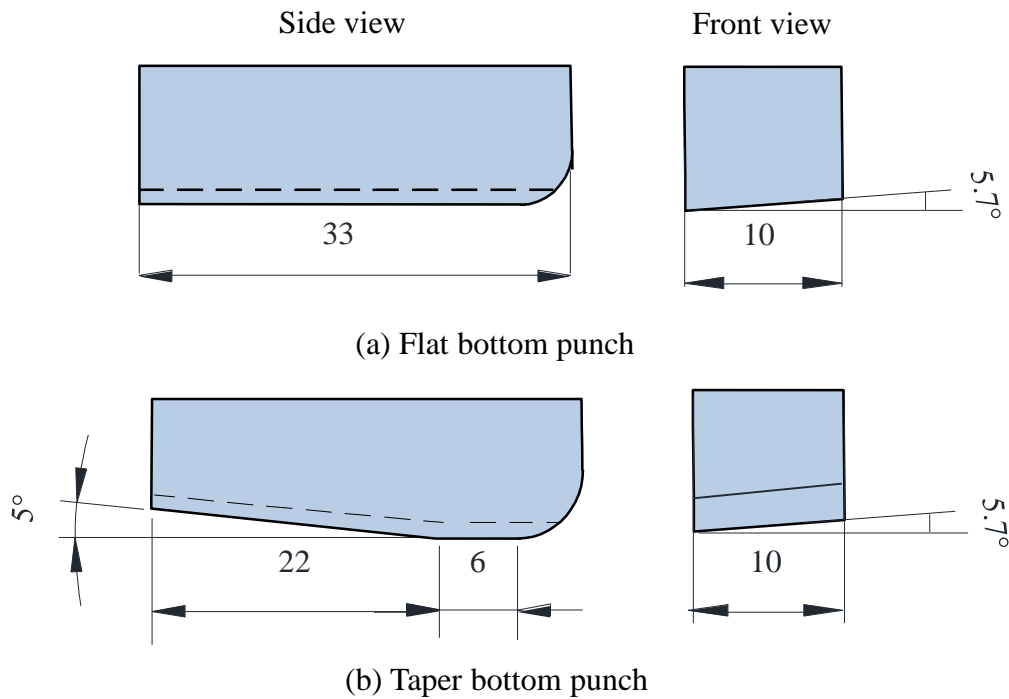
Dimensions of flat and taper bottom inclined punches.
